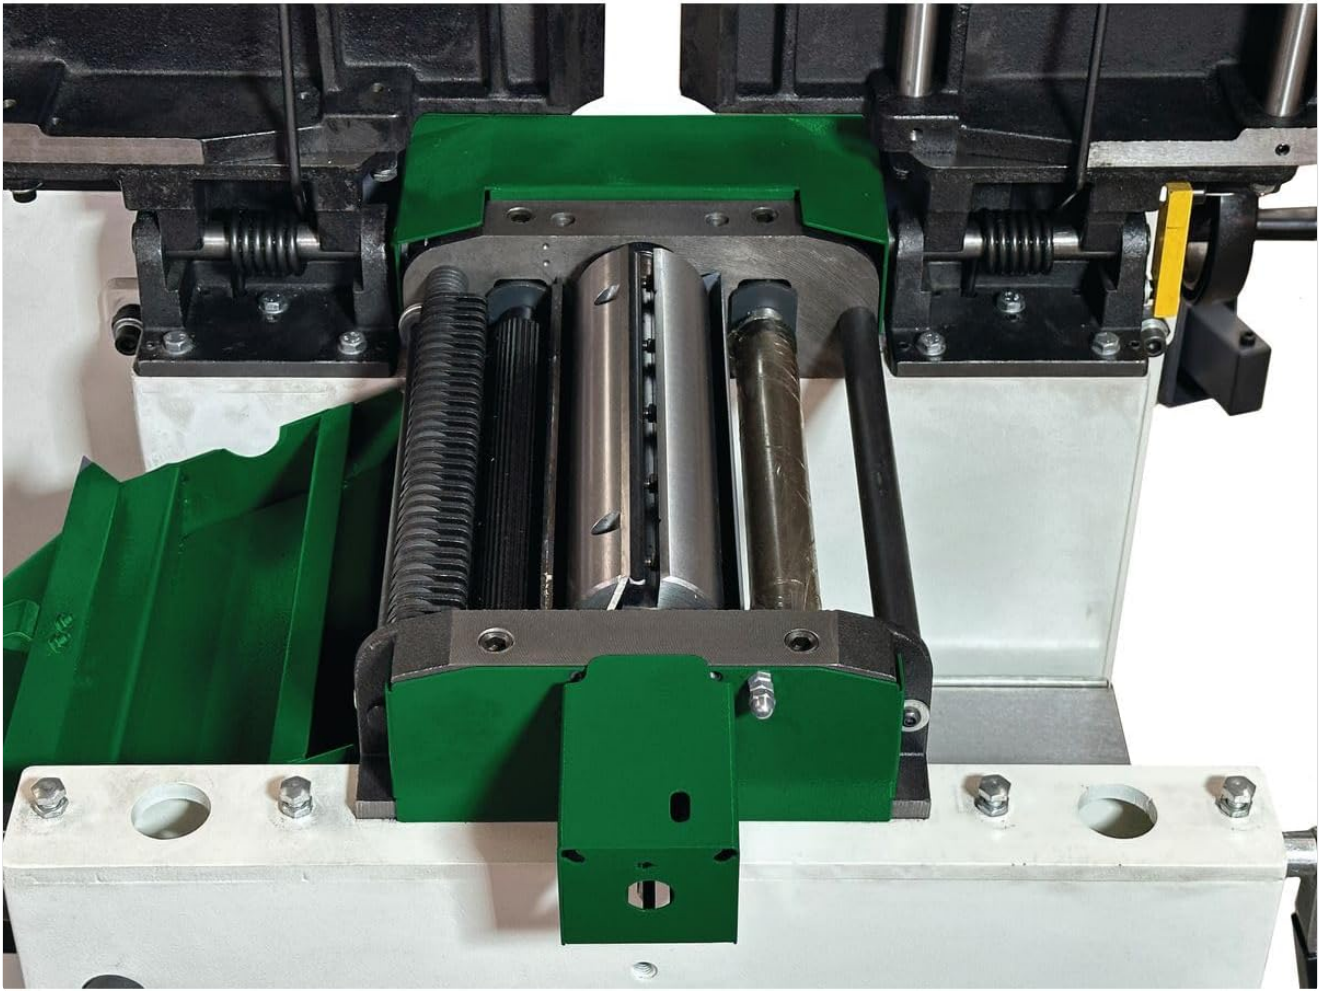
View of the cutter block and feed rollers. This shows the mechanism responsible for material removal during planing and thickening operations.
